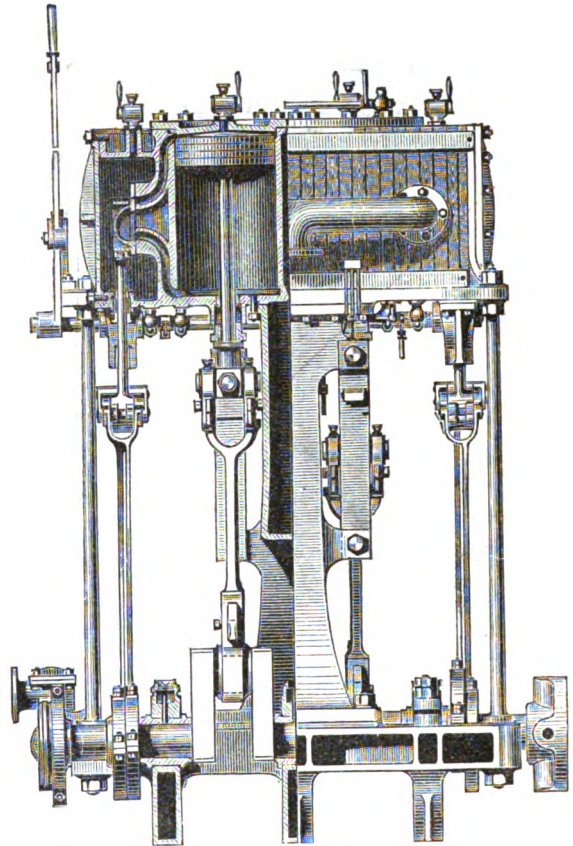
is the end elevation, and Fig. 37 the side elevation, partly shown in section, of our Double-Cylinder Screw Engines, 14 inches diameter, and 18 inches stroke. We make all our Double-Cylinder Engines above 8 inches diameter on this design, which is of the most substantial description—as will be seen from the woodcuts: the general arrangement is somewhat similar to our usual pattern, except in regard to the framing. This consists of a central standard of massive design, and cast hollow to give great stiffness, to which the guide bars are attached on each side by means of projecting lugs. The base of this standard where it rests on the bed plate extends beyond the centre line of the cylinders, and in addition, the outer corners of the cylinders are supported by four turned wrought-iron stanchions or pillars, thus securing a framework of great rigidity combined with lightness, while every part of both Engines is perfectly accessible for the purpose of necessary adjustment. As shown in the woodcut, the reversing lever has been carried upwards so as to be worked from the deck, but it is always arranged to be worked from level of bed plate unless otherwise ordered. The other details are very similar in design to those already described, our chief care being to have all parts made so as to endure hard work. For Prices of these Engines, see our Tabular Price List, pages 36 and 37.
